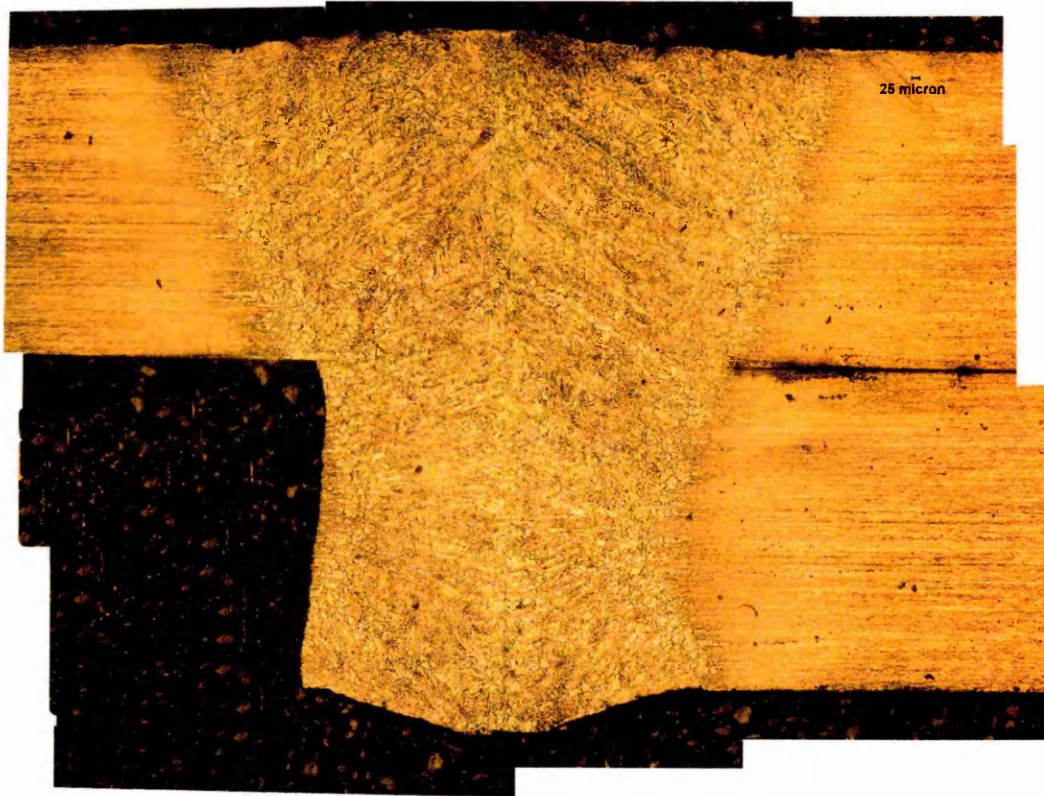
Fatigue sample cross-section showing fatigue failure in the bottom sheet for 1mm 2101 similar metal lap joint
